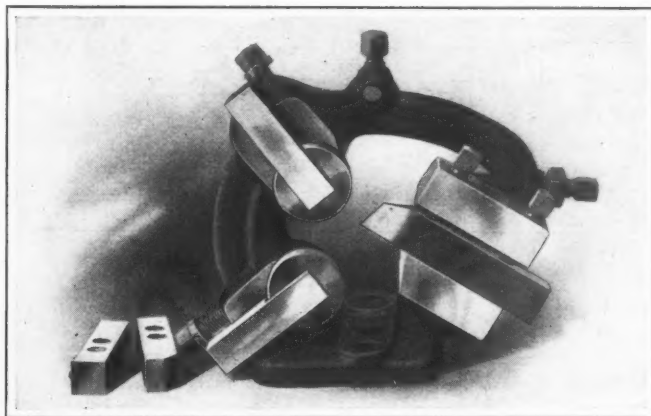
Standard Type of Turner for Use on Gridley Automatic Turret Lathe
